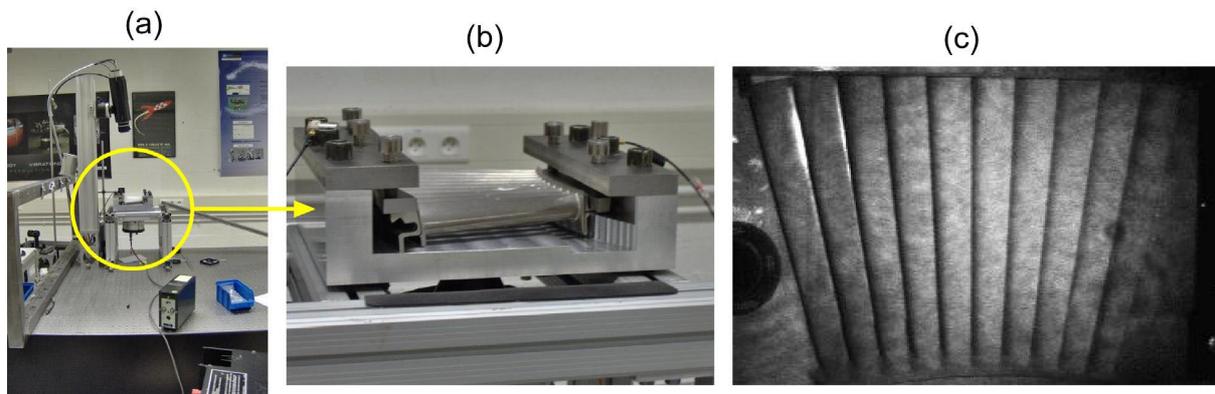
(a) Test bed with the stator segment in its mounting tool and small shaker below. (b) detail of the object and mounting tool. (c) image of the stator segment.
